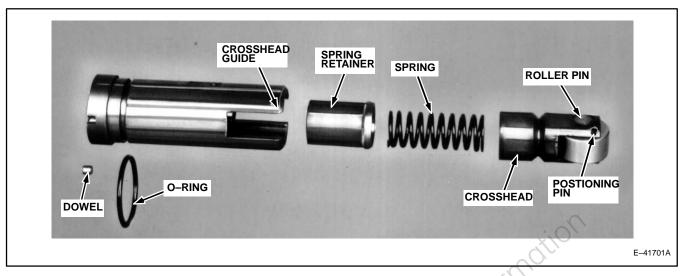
Fuel Crosshead and Guide Assembly (Typical).
